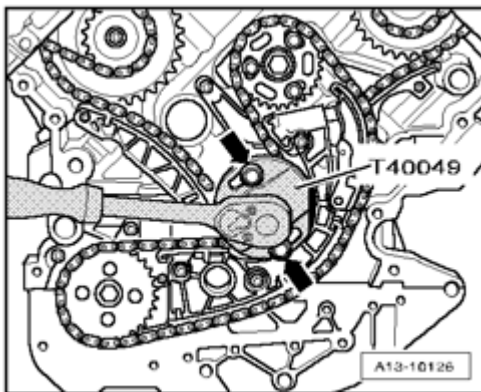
Installing Key T40049 At Rear On Crankshaft Using 2 Old Bolts For Dual-Mass Flywheel
